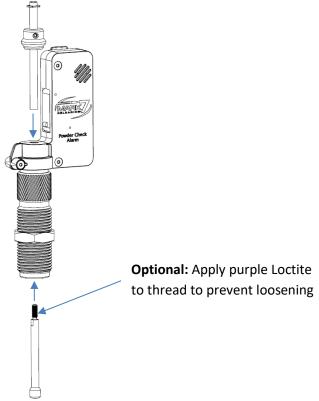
Assembling the Trigger and Rods onto the mounted product.
